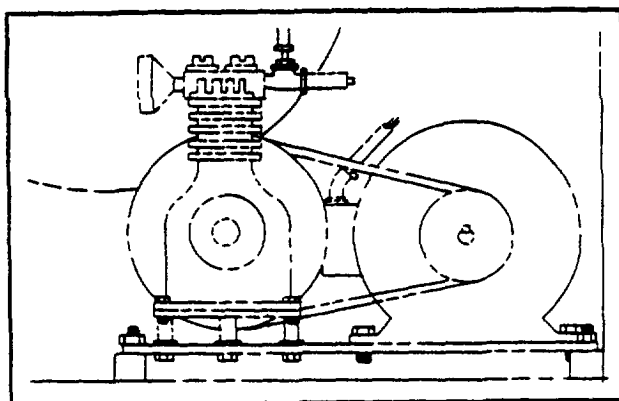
AIR COMPRESSOR ASSEMBLY.
